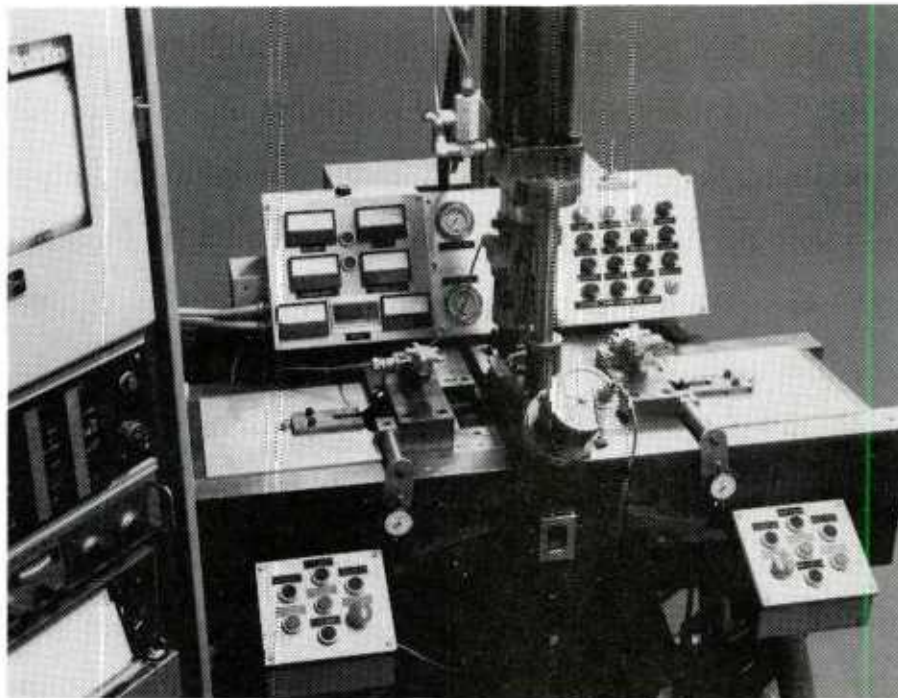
Operator's View of Isothermal Roll Forging Machine (#79-5314)
